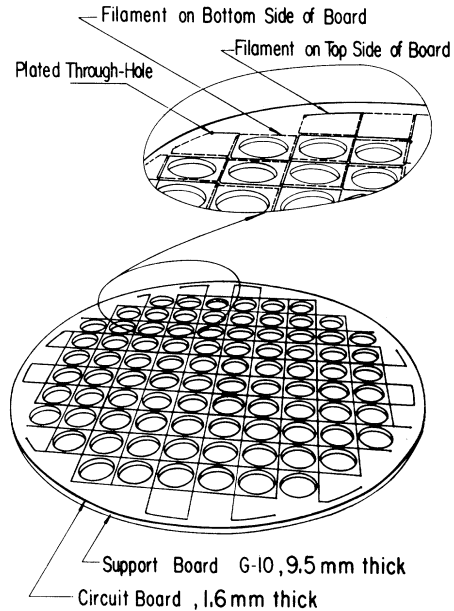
A perspective view of the gradiometer circuit board mounted to a 1-cm thick G-10 support plane. The gradiometer pattern uses both sides of the circuit board. Holes are cut to reduce mass for economy in cooling to 4 K.
